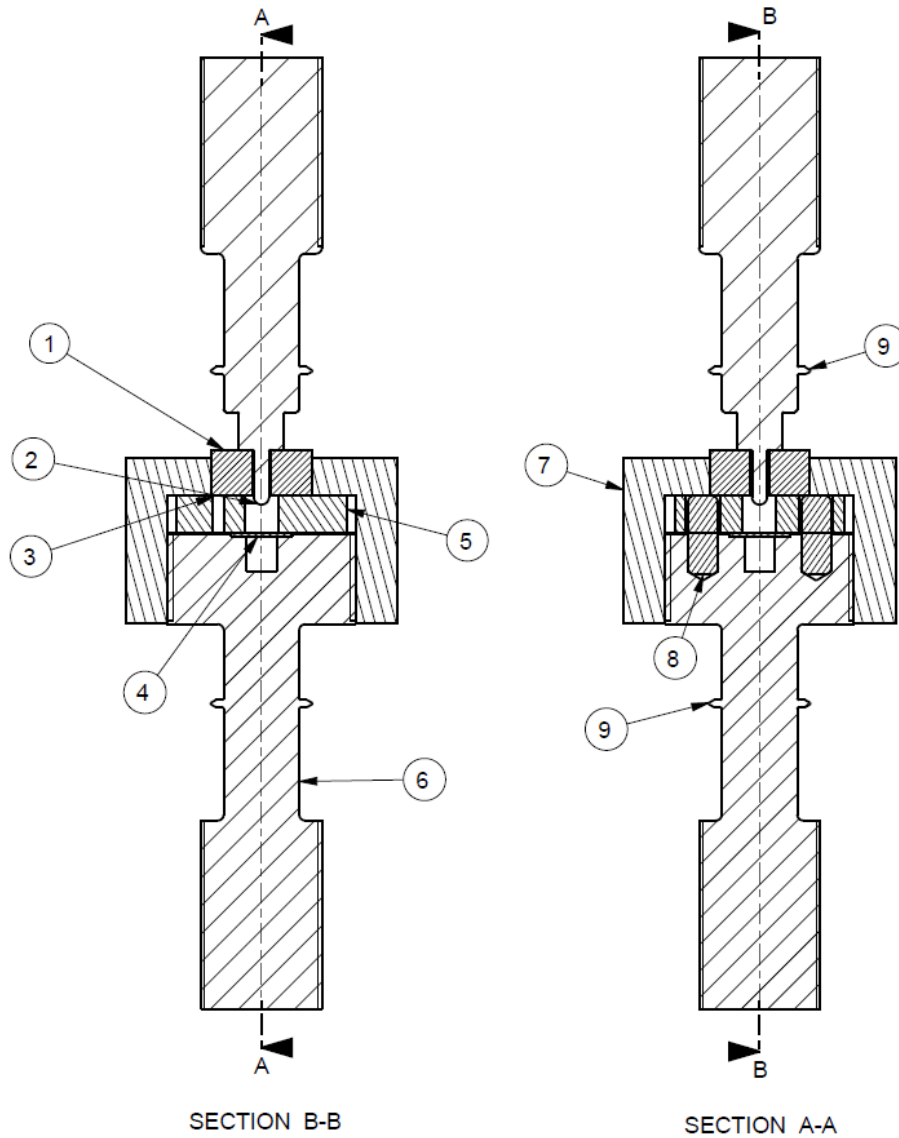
Detailed drawing of rig 2. The part numbers are as follows: 1. Alignment bush 2. Hemispherical punch head $R = 1.0\text{mm}$ 3. Thermocouple location 4. Specimen 5. Clamping disc 6. Lower die 7. Upper die 8. Locating pin 9. Knife edge for LDVT
